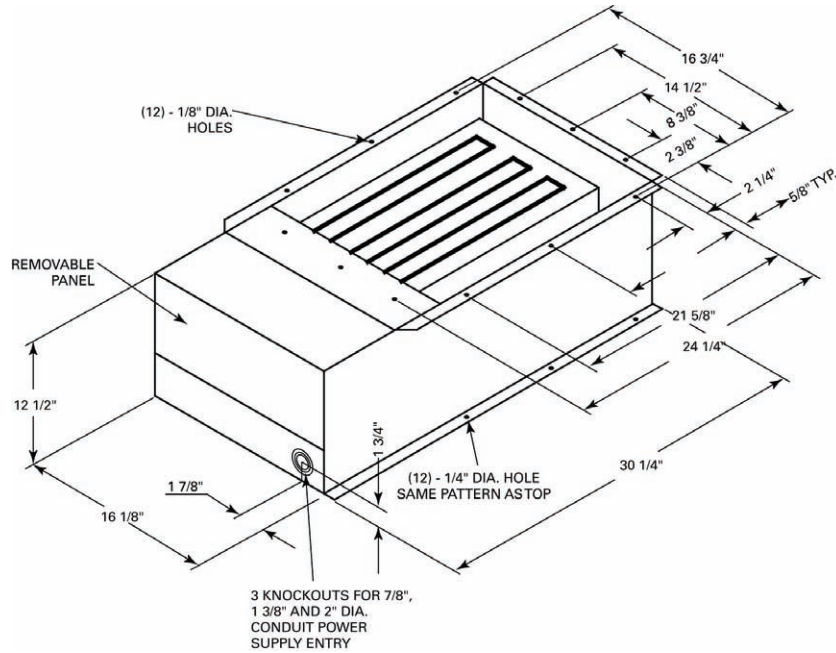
Electric Heater Accessory for over 10 Ton Air Handlers. All dimensions are in inches.
